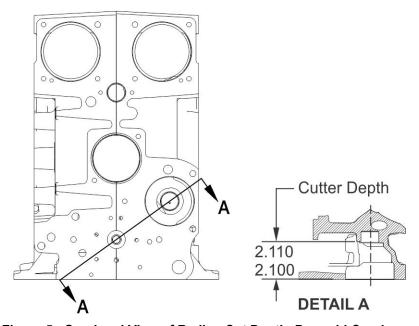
Overhead View of Radius Cut Depth, Permold Crankcase
